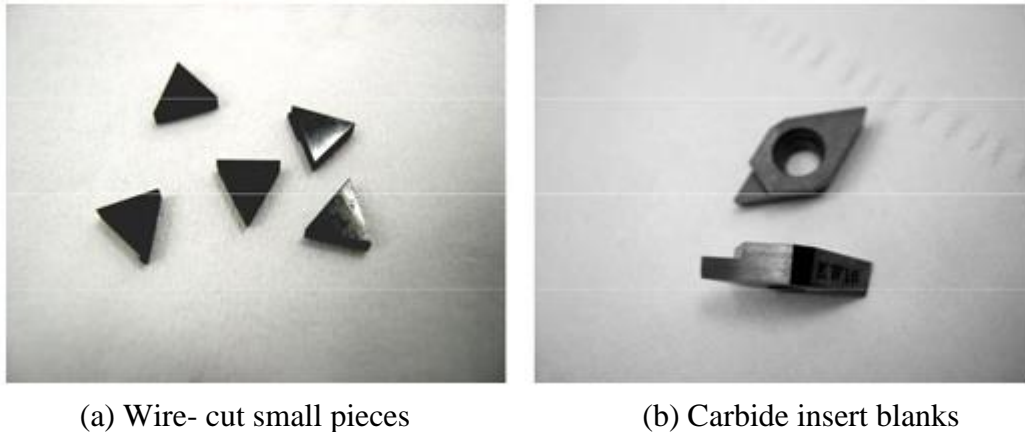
Wire-cut EDMed PCD small pieces and carbide insert blanks.
